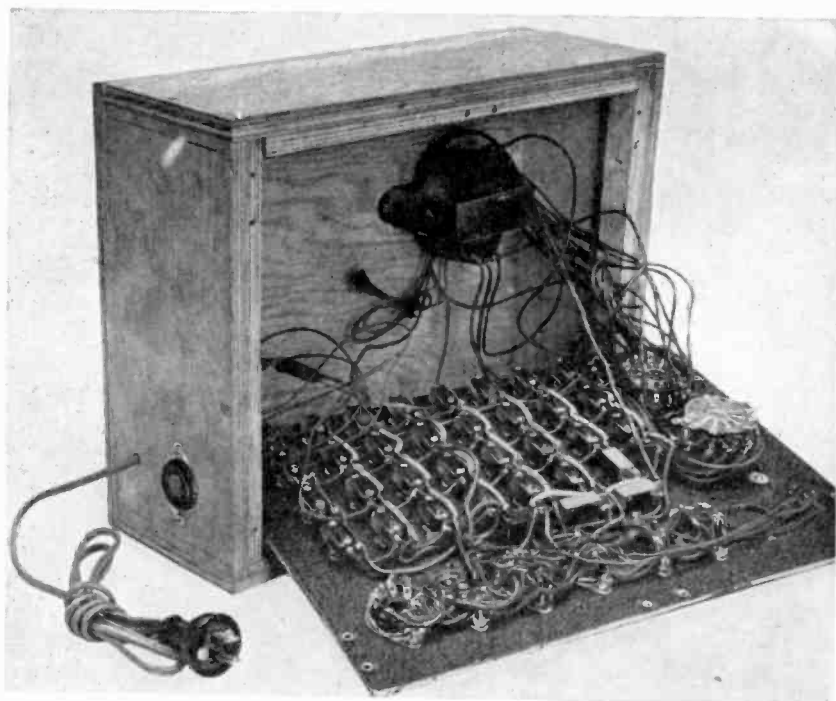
Rear view of adapter, disclosing internal construction and wiring.
